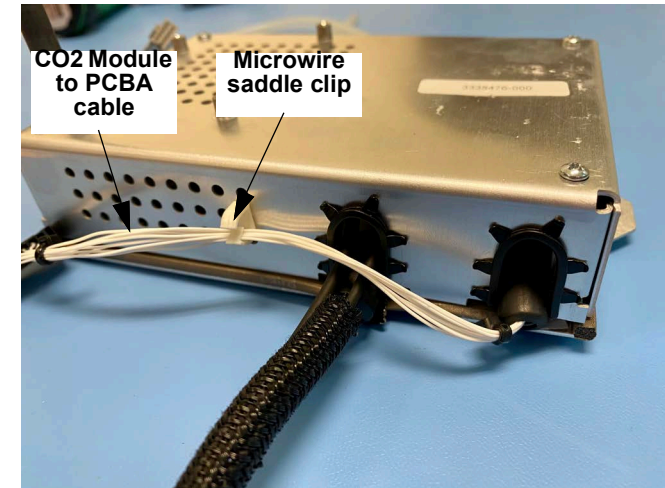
CO2 Module to PCBA cable microwire saddle clip
